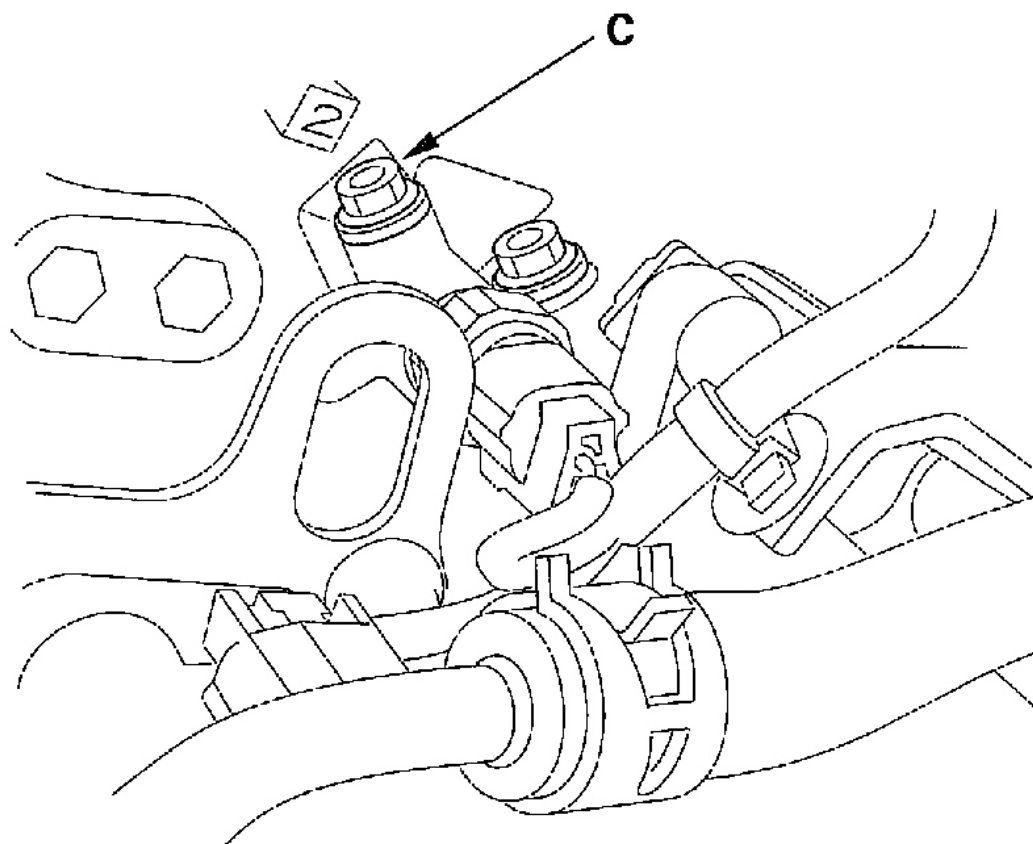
Identifying Oil Pressure Gauge Hose & Adapter
